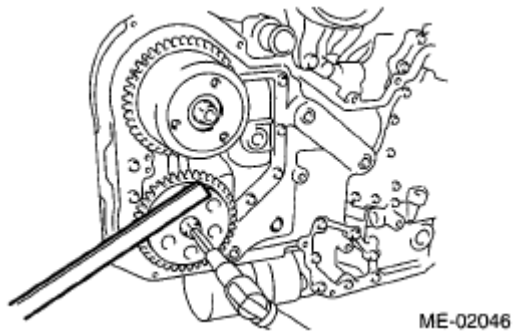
Identifying ST 18231AA020 Cam Sprocket Wrench
